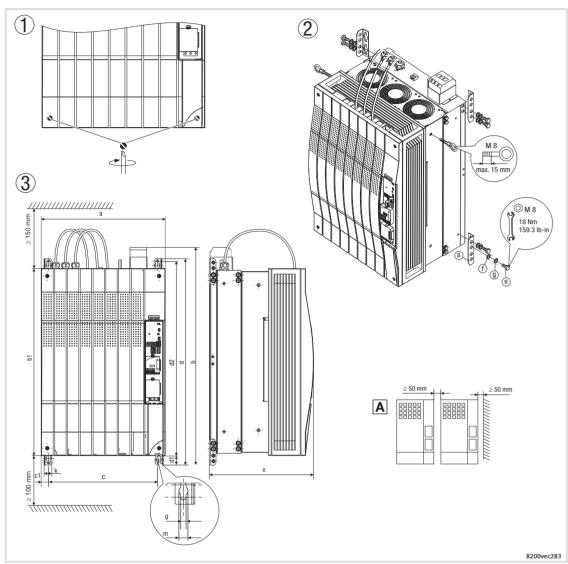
Standard mounting with fixing brackets 75 ... 90 kW
